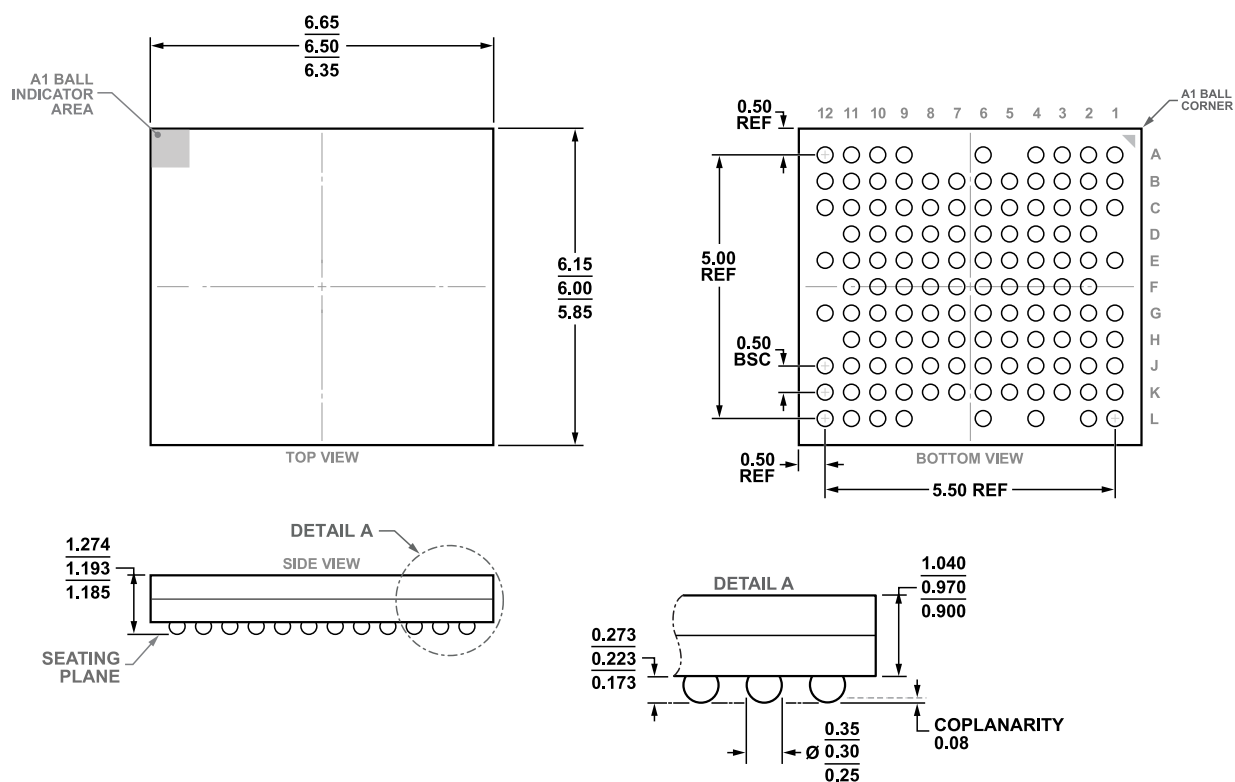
120-Ball Chip Scale Package Ball Grid Array [CSP_BGA],
